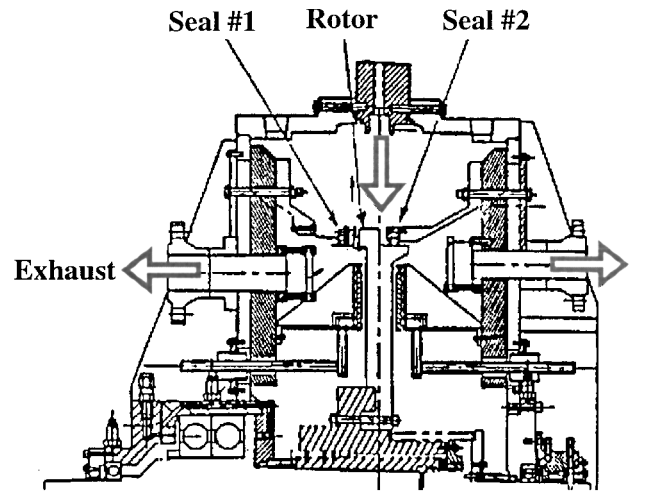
Cross section view of 0.91-m (36-in.) rotary seal test rig.
